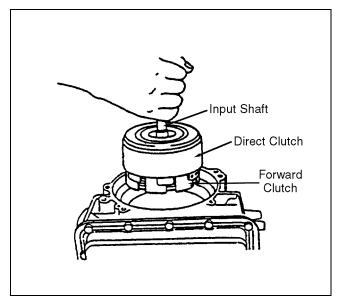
J-11. Forward Clutch, Direct Clutch and Input Shaft Removal
